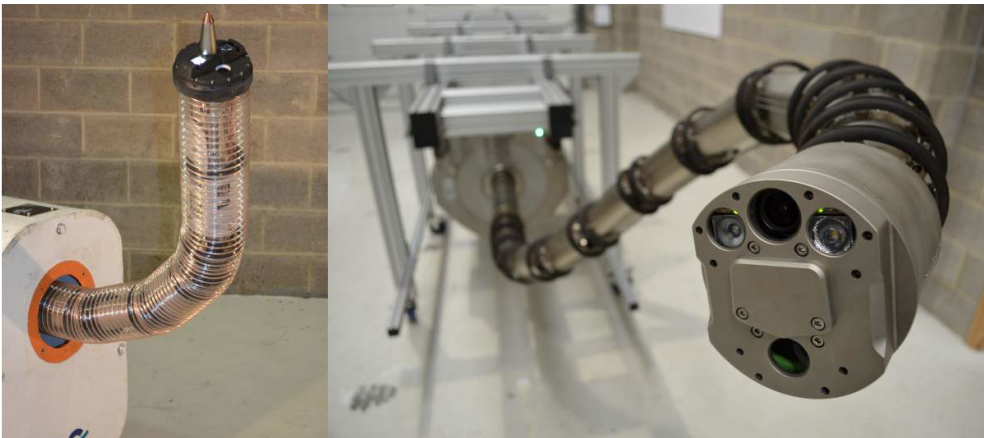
Oliver Crispin Robotics Ltd. Snake-arm robots, series II, X125 System. On the left: sleeved and integrated manipulator with a laser cutting head. On the right: unsleeved, integrated manipulator with inspection camera and light tool. (Source: <http://www.ocrobotics.com>.)
